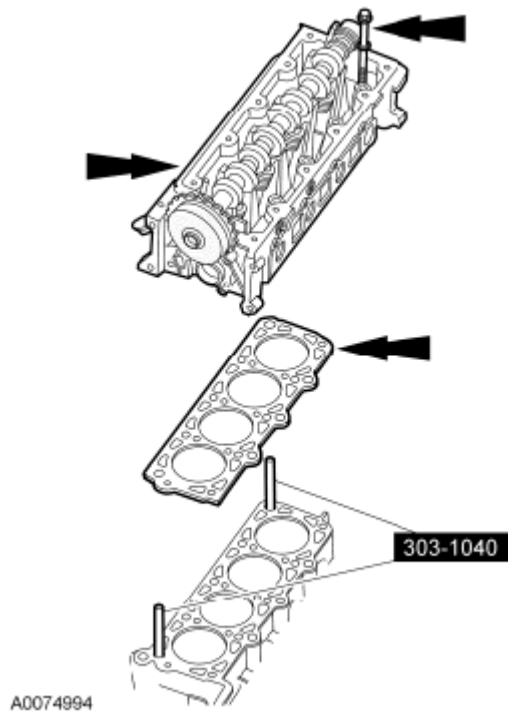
Locating Cylinder Head Gaskets And Cylinder Heads And Dowels
